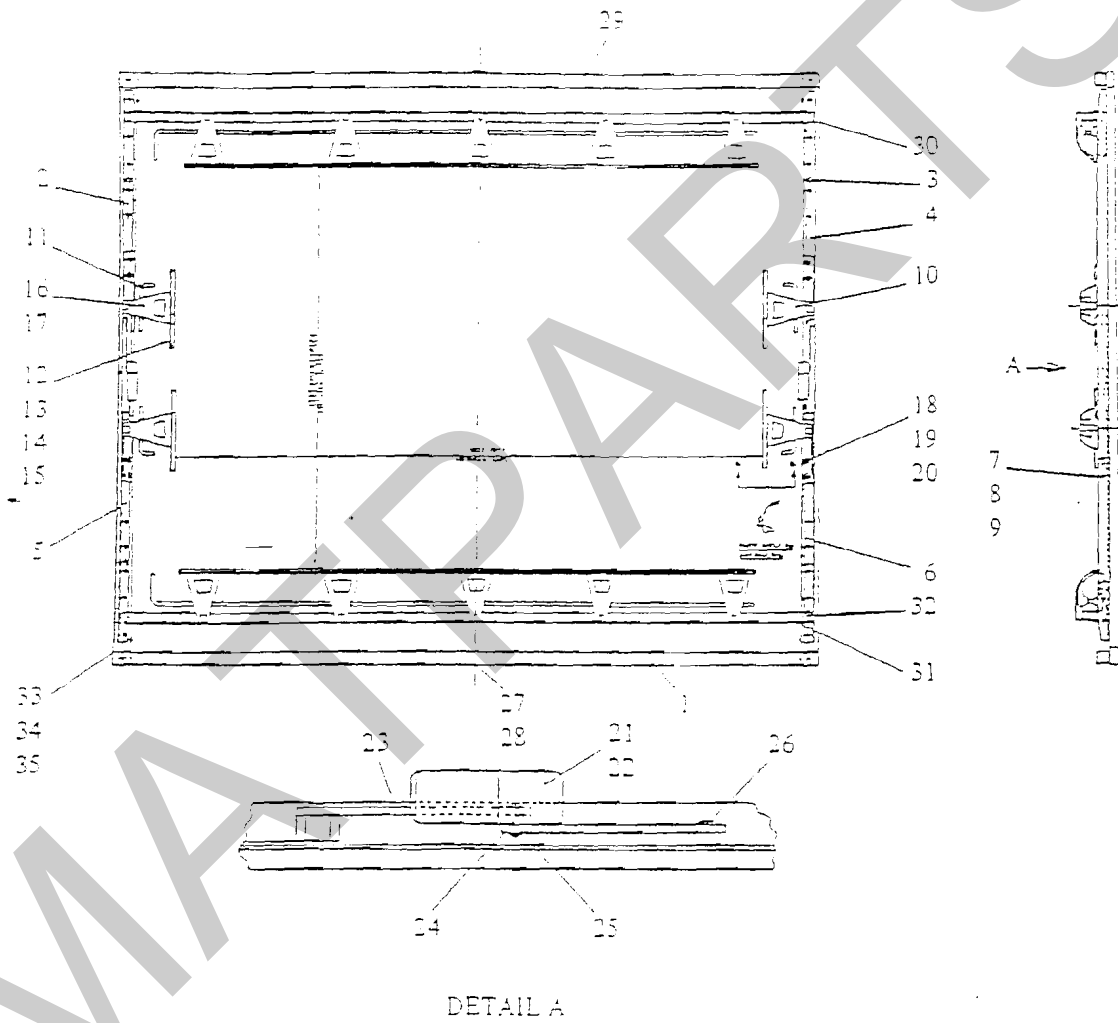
STRETCHER FRAME ASSEMBLY - SIZE 1
